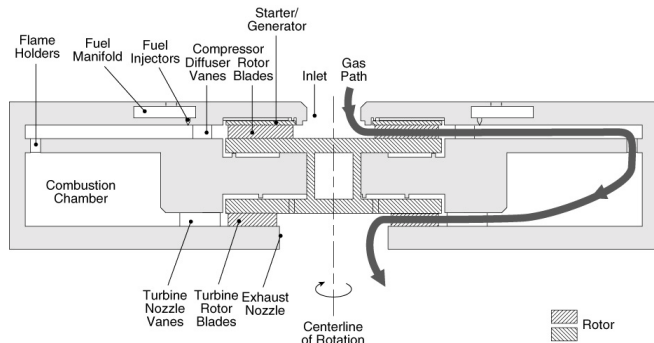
Cross-sectional view of the microengine. The fuel valve structure will be placed on top of the stack, between a fuel tank and the supply plenum.
